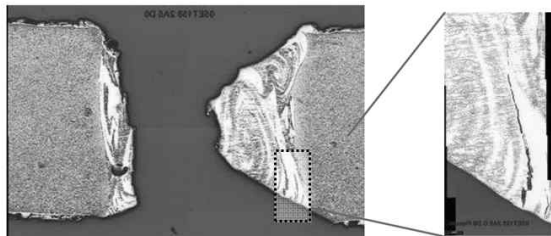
Failure of a polluted weld in a dynamic tensile test
